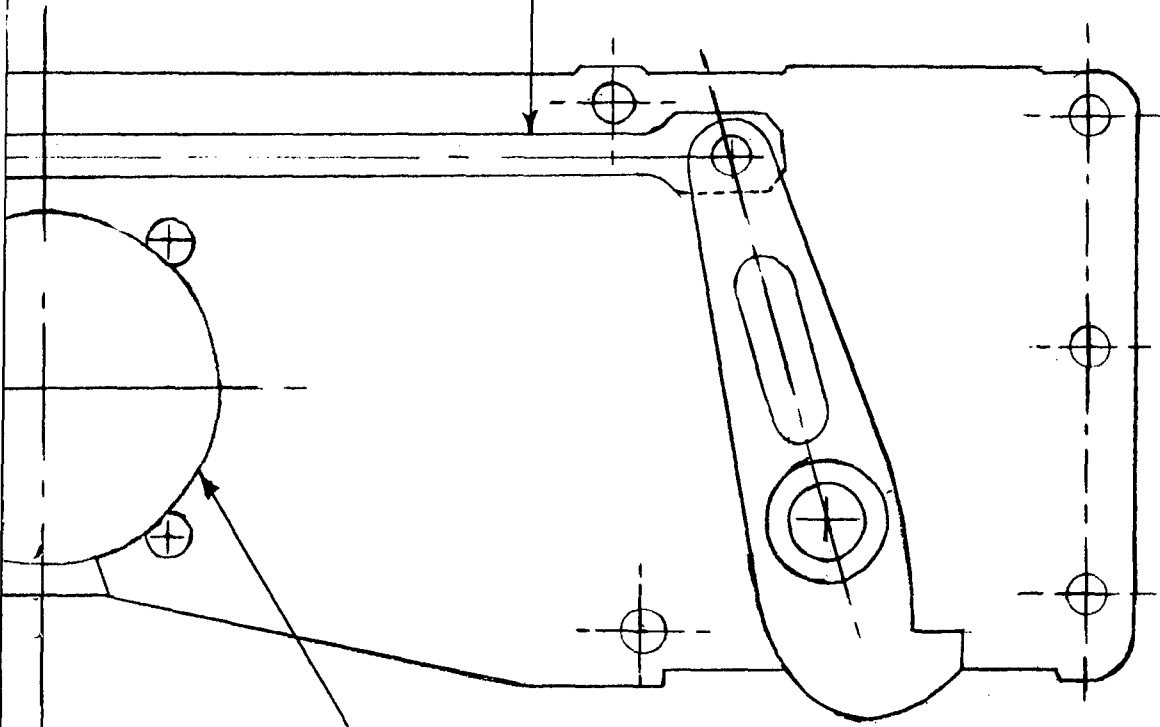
Drawing of Aero X61B Bomb Rack Outlining Parts Referred to in Report
